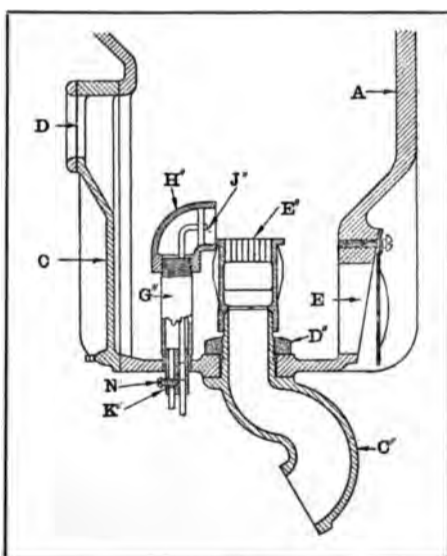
SECTIONAL VIEW OF LOWER PART OF BURNER BOX.
